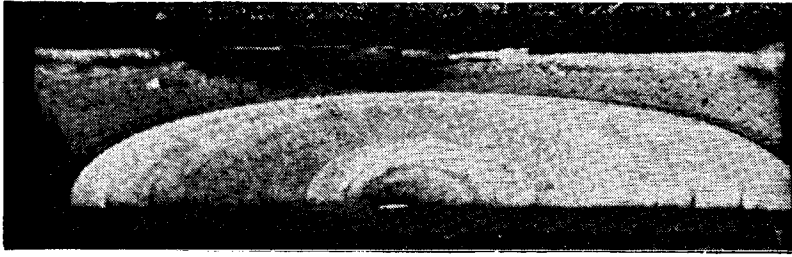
Fractography of surface fatigue crack growth in shot peened 2Cr13 steel
